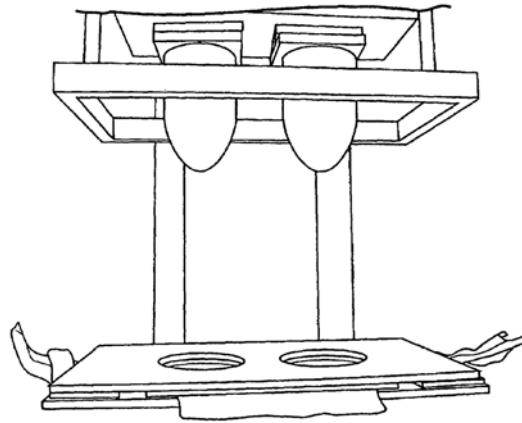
Moulding machine with double bullet mould. Source: Liu, 2007a
